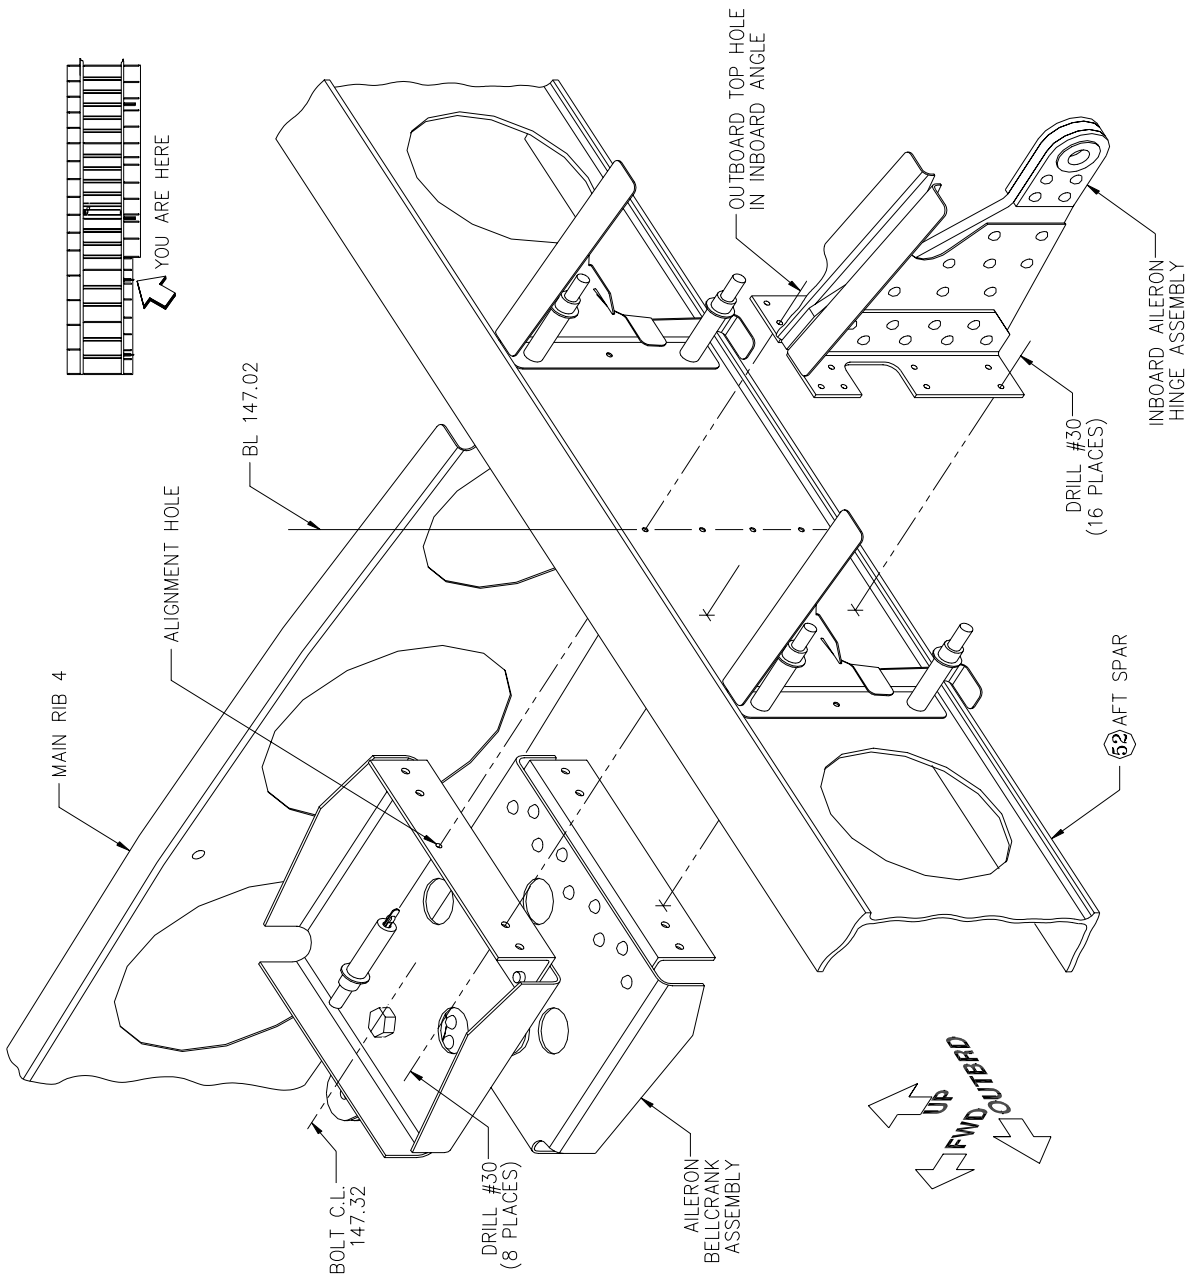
Aileron Bellcrank Assembly and Inboard Hinge Installation
